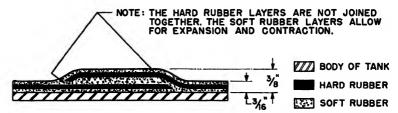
Section through a Triflex expansion joint in rubber tank lining.
